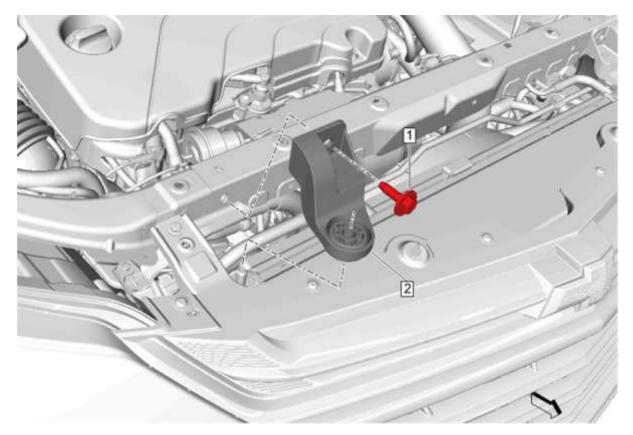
Radiator Upper Bracket-Right Side Courtesy of GENERAL MOTORS COMPANY
